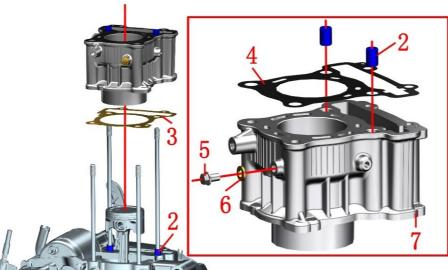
CYLINDER BLOCK ASSEMBLY		Cylinder assembly-1	CHK	(0)
